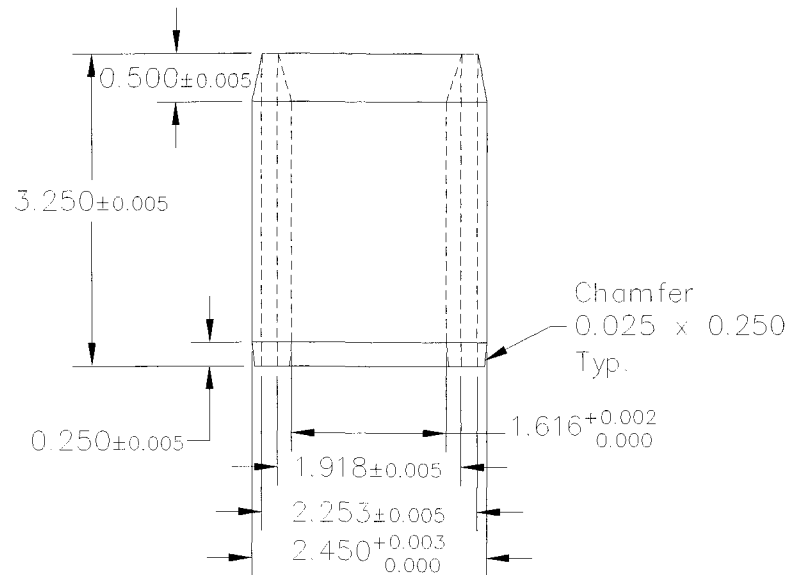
Drawing of aluminum tabs that are bonded to specimen ends.
